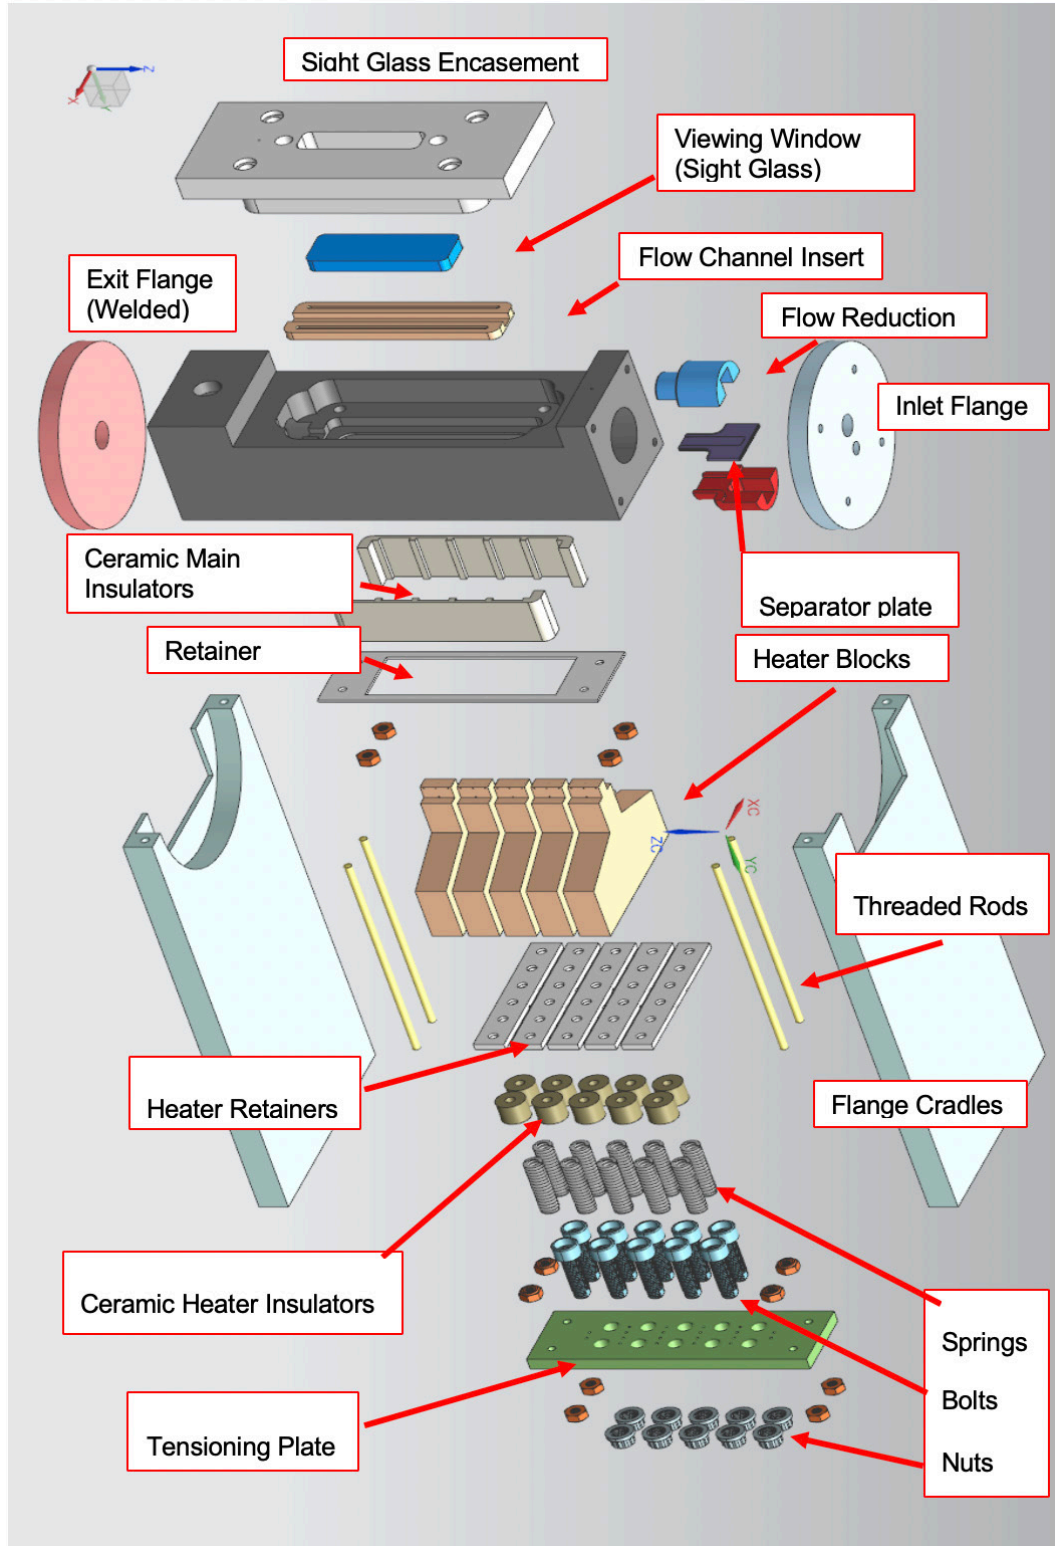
Test-Section and Heater Mounting Block exploded view. This figure indicates final main parts of test-section, copper heaters along with the cradles and rest of components.
